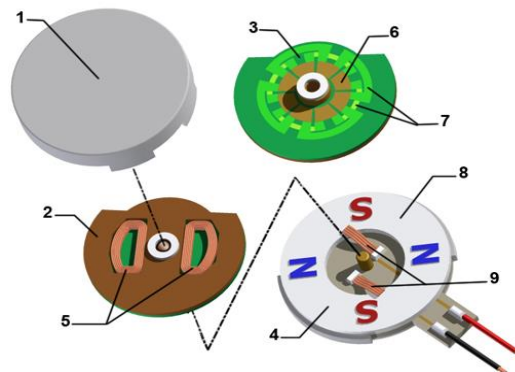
vibration motors, :(1) enclosure top, (2) rotor (view as mounted), (3) rotor (inverted view), (4) enclosure bottom, (5) coils, (6) commutation points, (7) alternating power supply circuits, (8) ring magnet (showing representative polar zones), (9) power supply brushes. source: [20]
